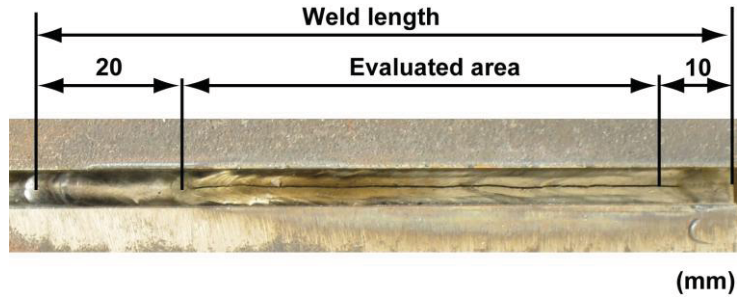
Evaluated area of hot wire laser welding.
